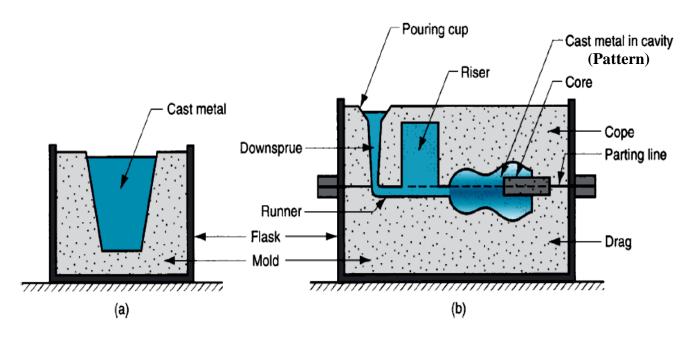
Sand casting molds; (a) open mold, (b) closed mold
